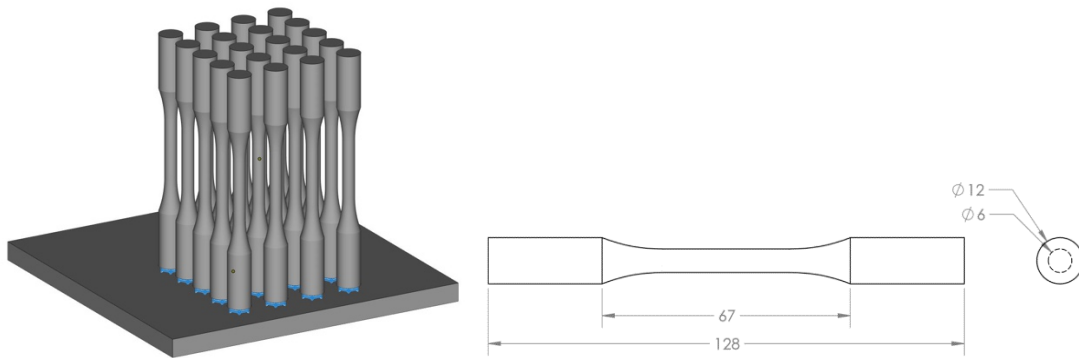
The build layout of the as-fabricated HCF samples and final dimensions
